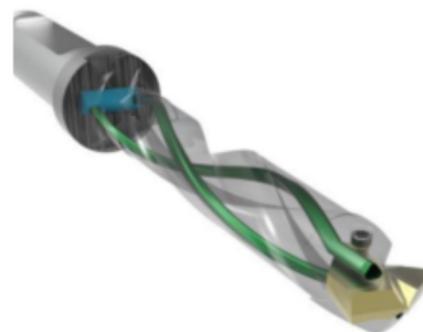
Spiral coolant ducts in the AM fabricated drill base body
